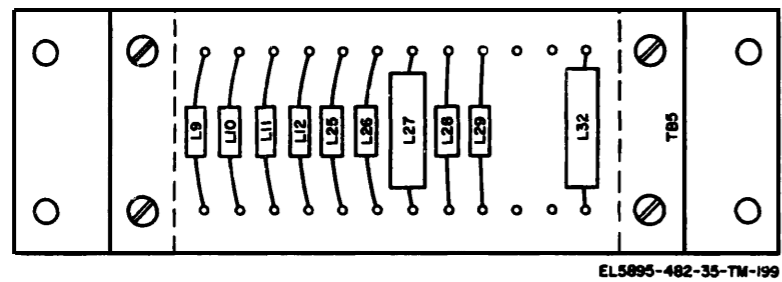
9151 linear power amplifier terminal board assembly TB5, parts location
